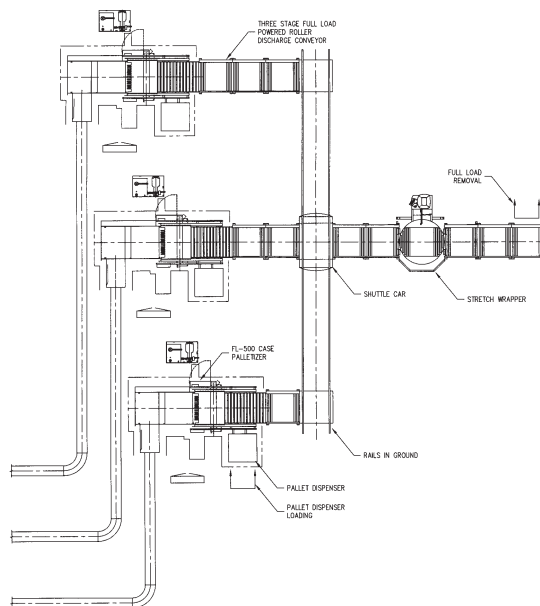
Floor Level Palletizer with Stretchwrapper
